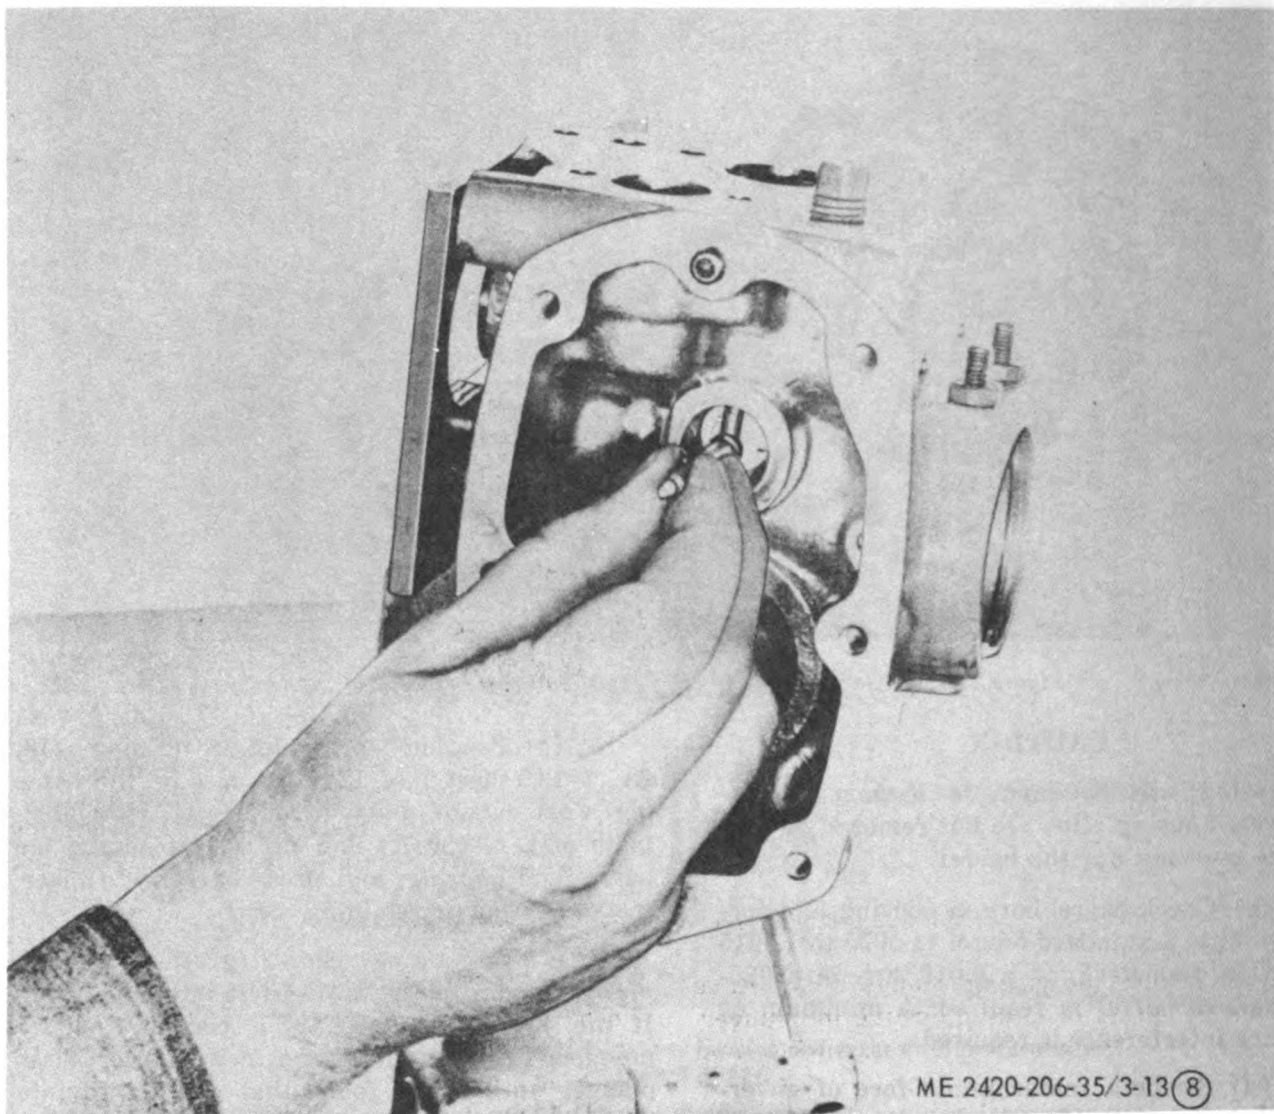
Checking front drive shaft bushing (sheet 8 of 12).
